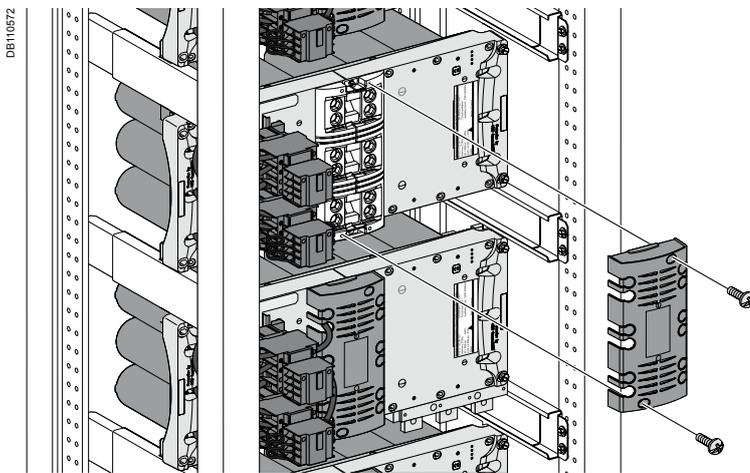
assembly details for fitting the protection shield for modules without busbar.
